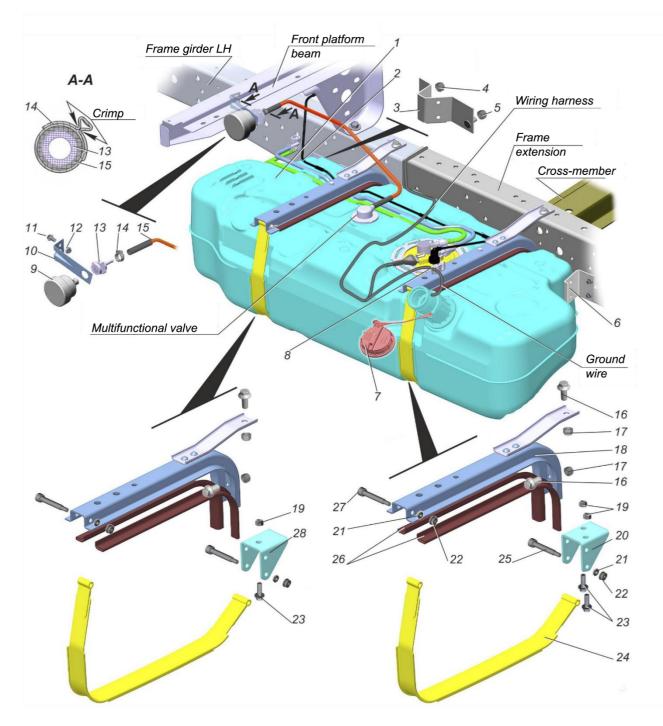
Fuel tank installation to flatbed vehicle with three-seat cab: 1 -fuel tank with fuel intake module; 2 -starting preheater fuel line ¹; 3, 6 -stops; 4, 5, 12, 17, 19, 22 -nuts; 7 -fuel tank plug; 8 -clip; 9 -air filter; 10 -bracket; 11, 16, 23 -bolts; 13 -air filter nut; 14 -clamp; 15 -vent line complete with hoses; 18 -fuel tank bracket; 20, 28 -clamp brackets; 21 -washers; 24 -fuel tank clamp; 25, 27 -special screws; 26 -shells
